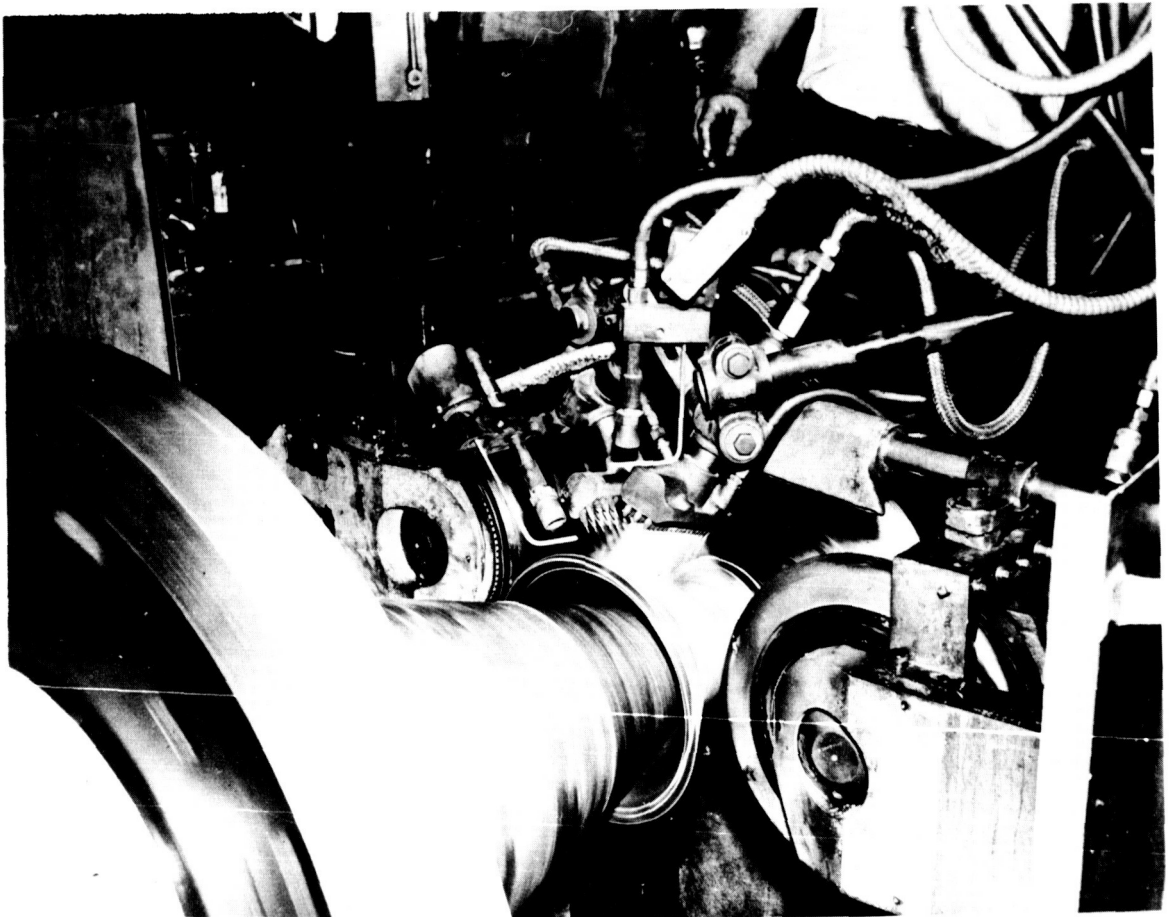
TORCH HEATING OF A BLANK DURING CONE-SHEAR FORMING (REF. 55)
